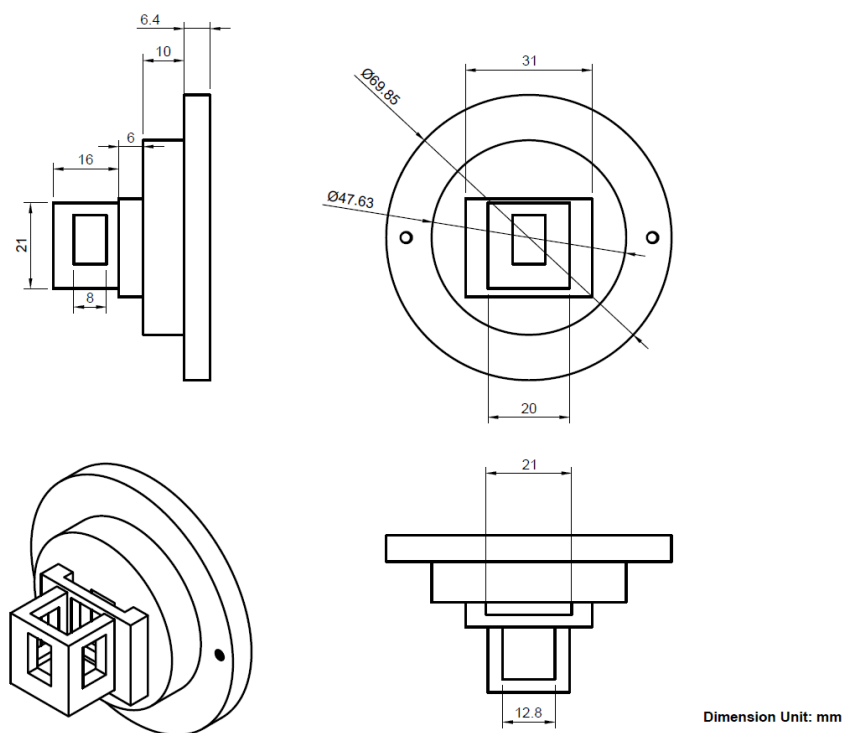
Schematic drawing of the customized sample holder with dimensions in millimeters (mm).
